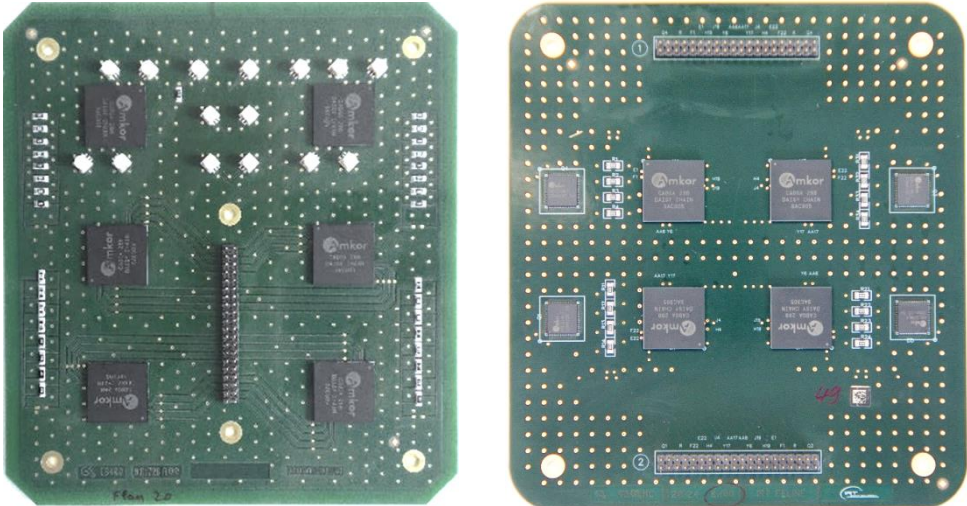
Test vehicles used to study the thermomechanical fatigue of solder joints, (a) B_ROBUSTESSE, (b) B_FELINE
